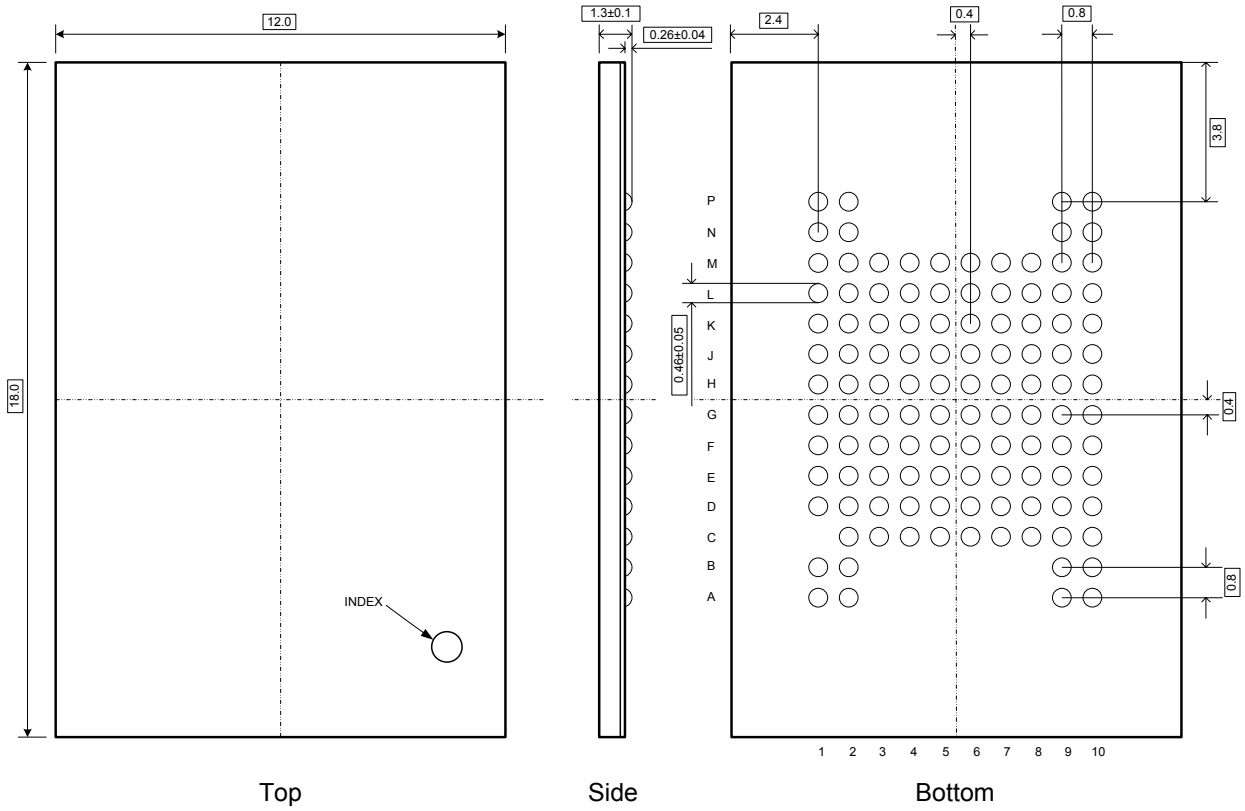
Mechanical Dimensions 12x18 FBGA Package
